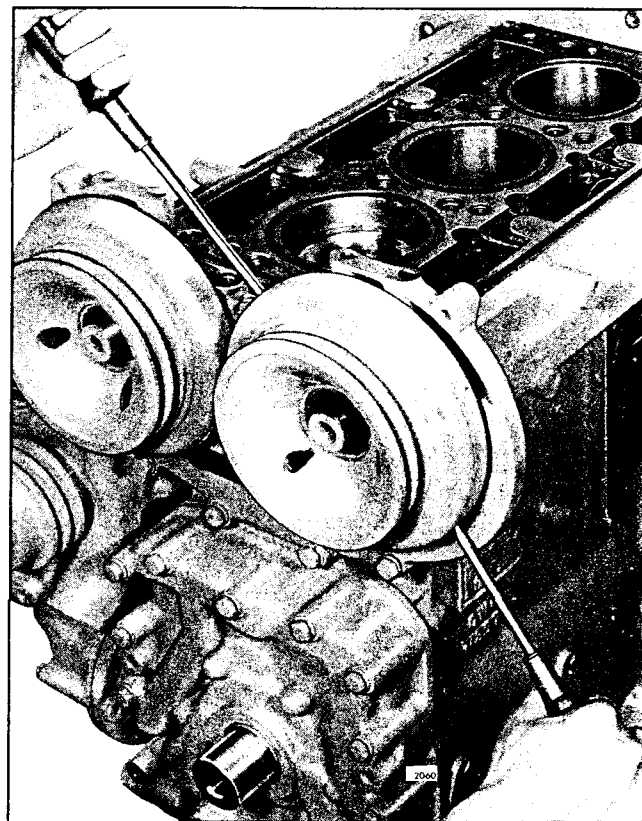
Removing Front Balance Weight (Pulley Type)
